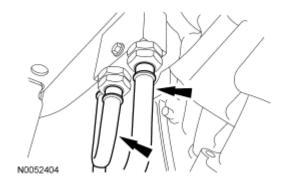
Locating Transmission Fluid Cooler Tubes Courtesy of FORD MOTOR CO.
